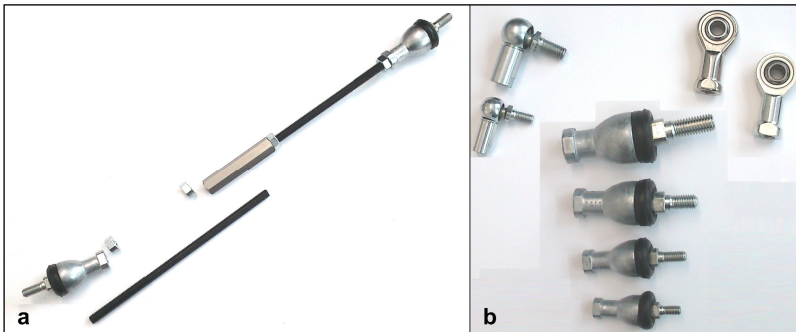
a) Leg assembled from left-hand and right-hand threaded bars and a coupling b) ball joints
